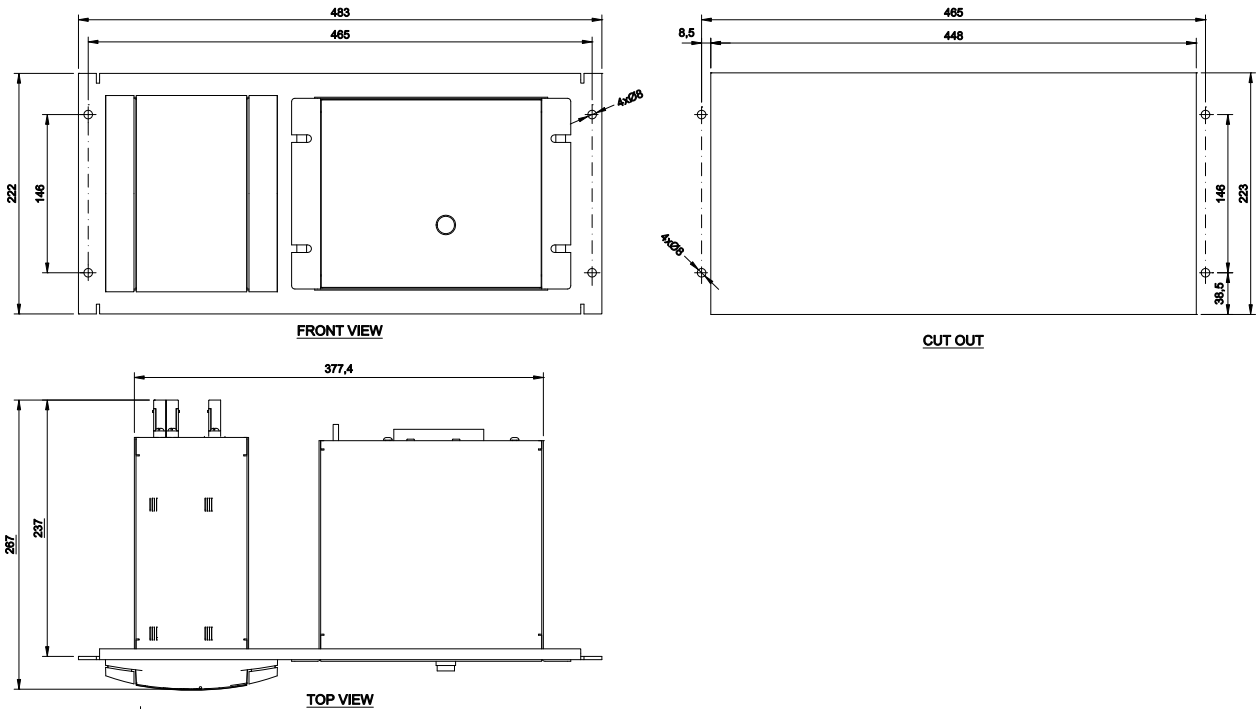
DIMENSIONS AND DRILLING FOR HID MODULE WHEN MOUNTED TOGETHER WITH MIB MODULE IN A 19" RACK
